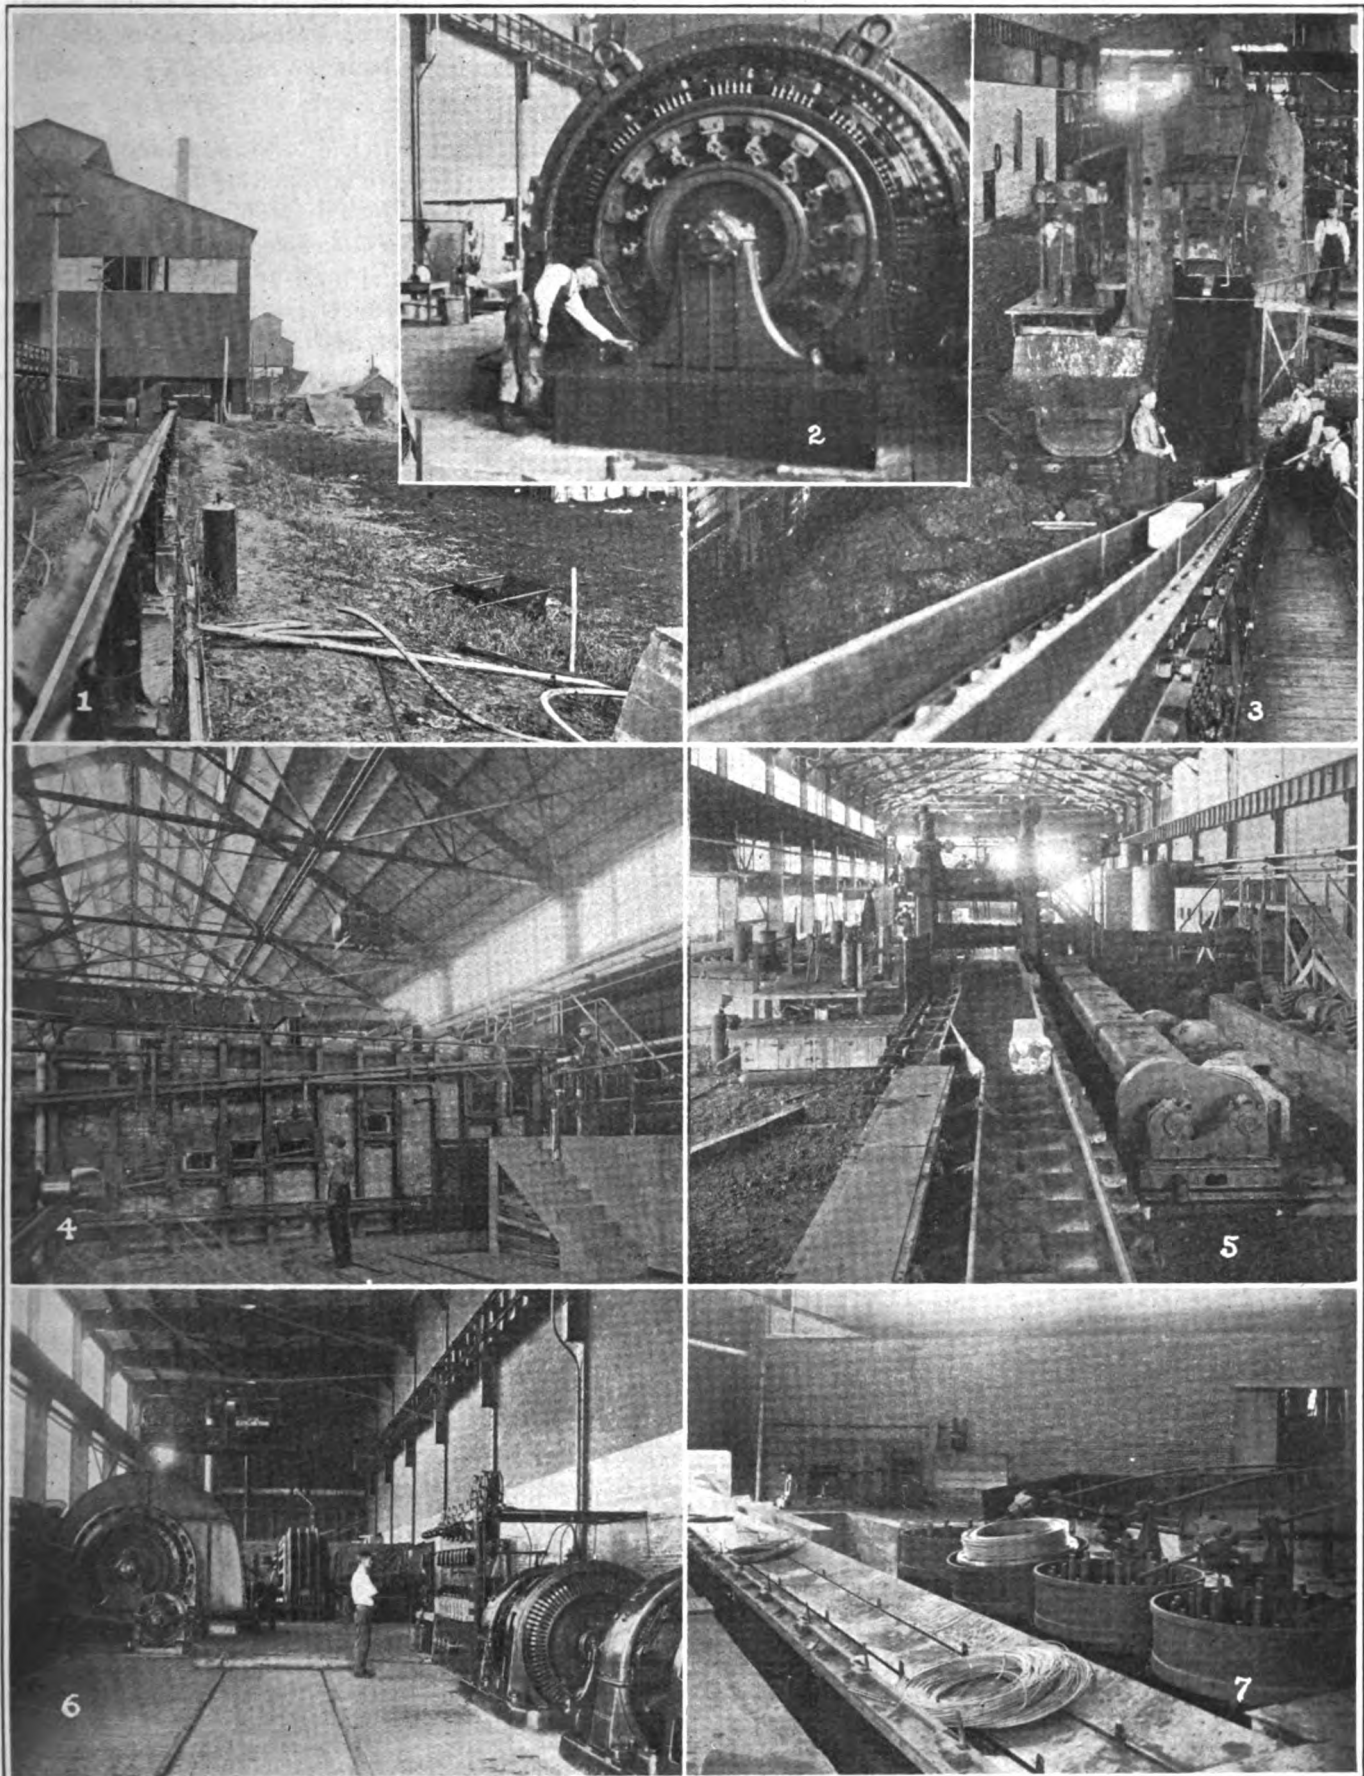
13½-inch billet leaving blooming mill on the way to the shear house. Fig. 2—One of the motors for driving the fly-wheel of the blooming mill. Fig. 3—Cutting 5 x 5 commercial billets. Fig. 4—Part of rod mill furnace where billets are reheated. Fig. 5—Ingot passing over rolls to the blooming mills in the background. Fig. 6—Part of the power station, showing motor driving flywheel of blooming mill at the left. Fig. 7—Coiling finished rods.
